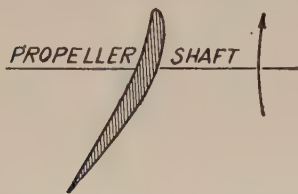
Relation of section of propeller blade to propeller shaft; radial view.
